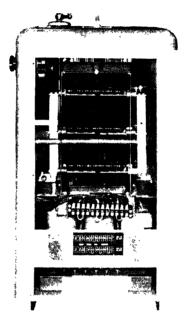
The internal construction of the plate type rectifier D.C. arc welder. The selenium plates are in the center. The transformer is below the plates. The air filter is at the bottom. The fine adjustment is on the left side near the top
